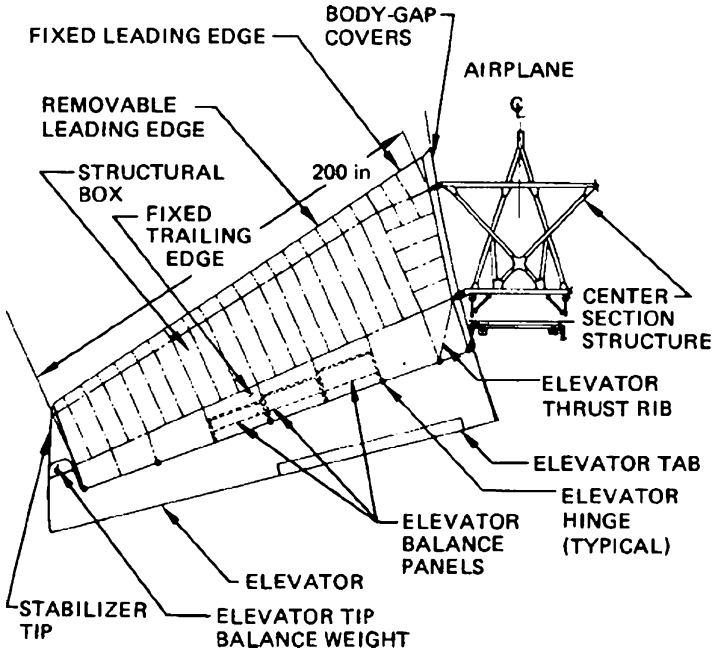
B-737 horizontal stabilizer general arrangement [1]
